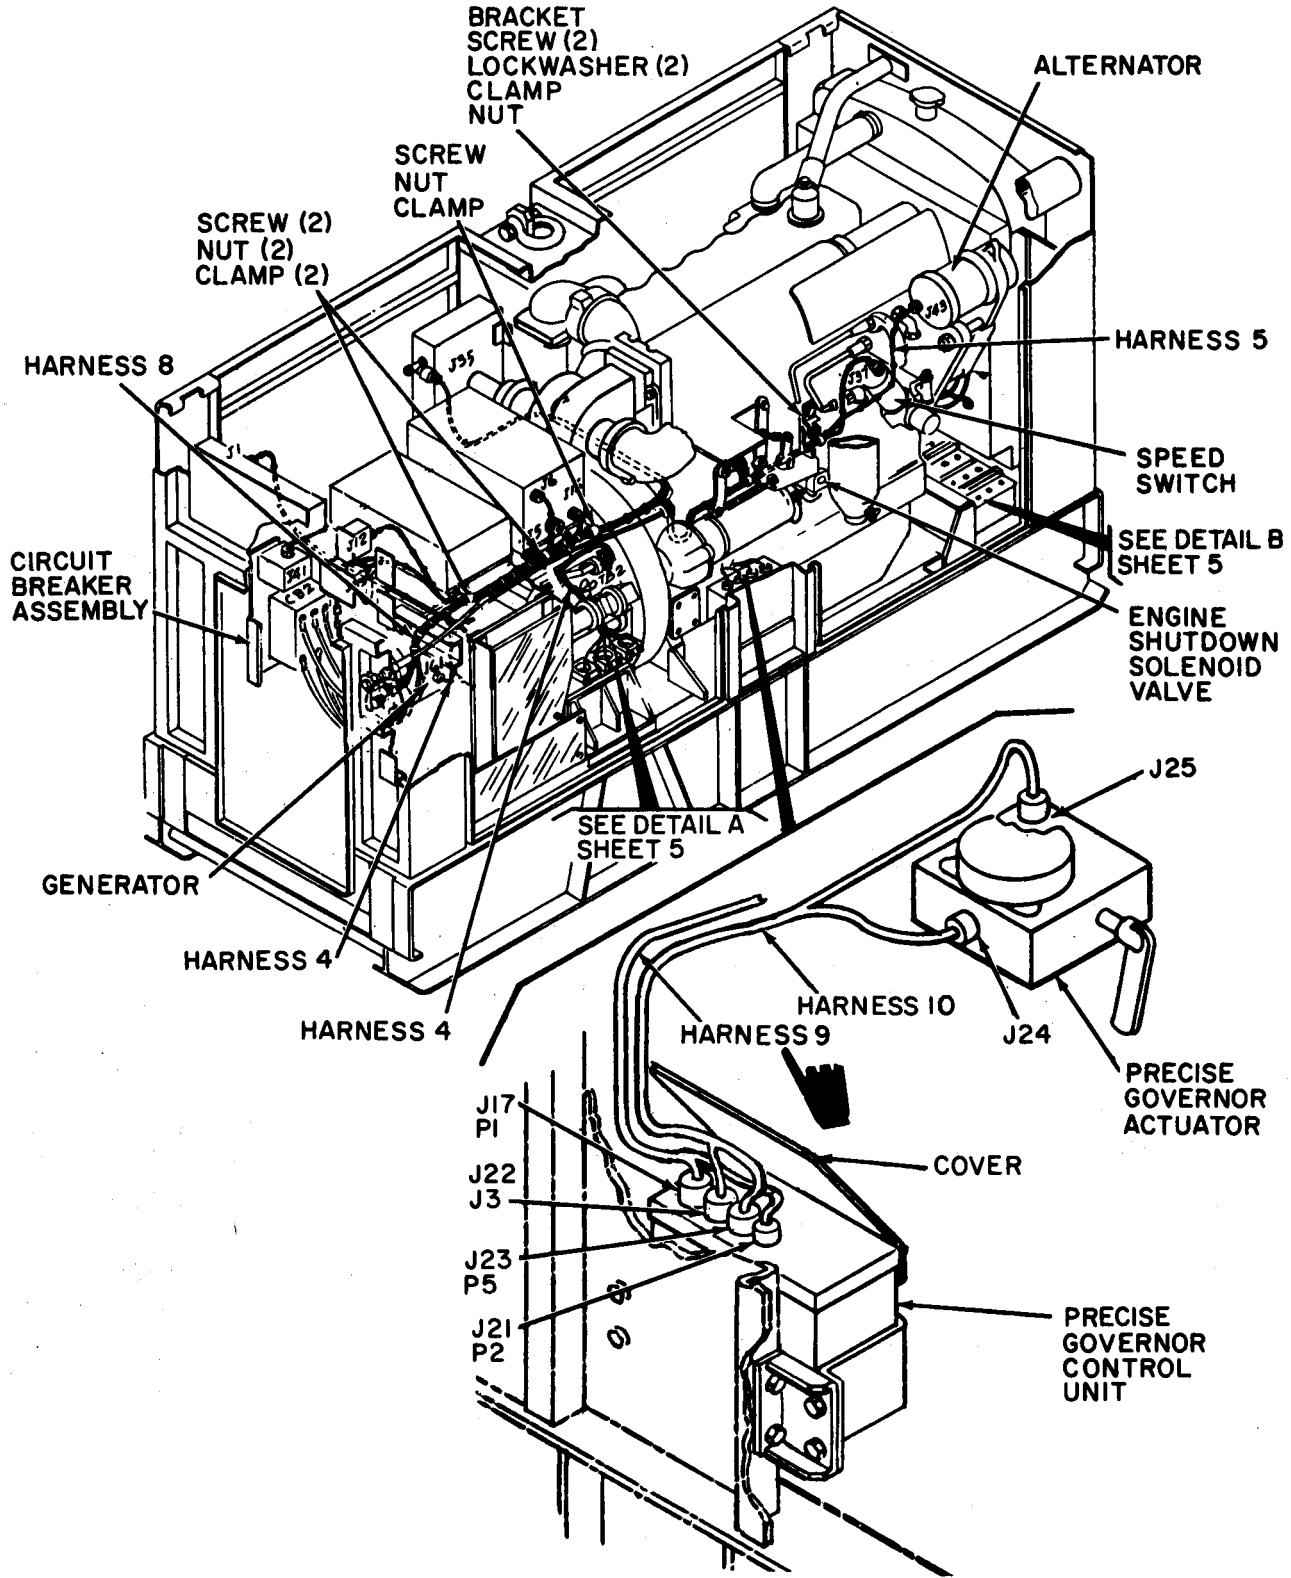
Wiring harnesses 400 hertz generator sets, removal and installation (sheet 4 of 5)
